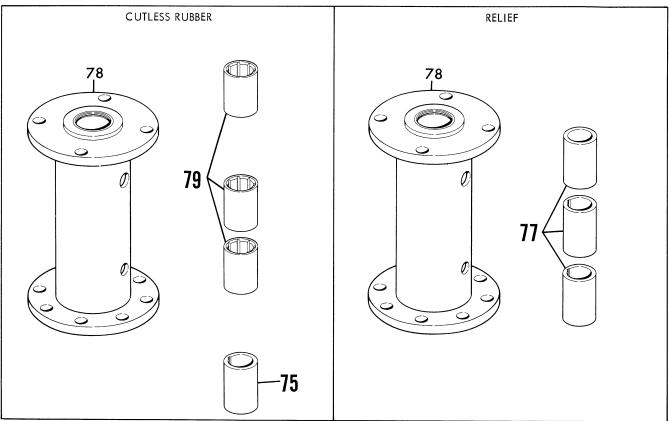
Model 631-632 Exploded View (Sheet 3 of 3)
